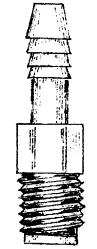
SxT (slip by thread) Flexible Black Poly Connector
